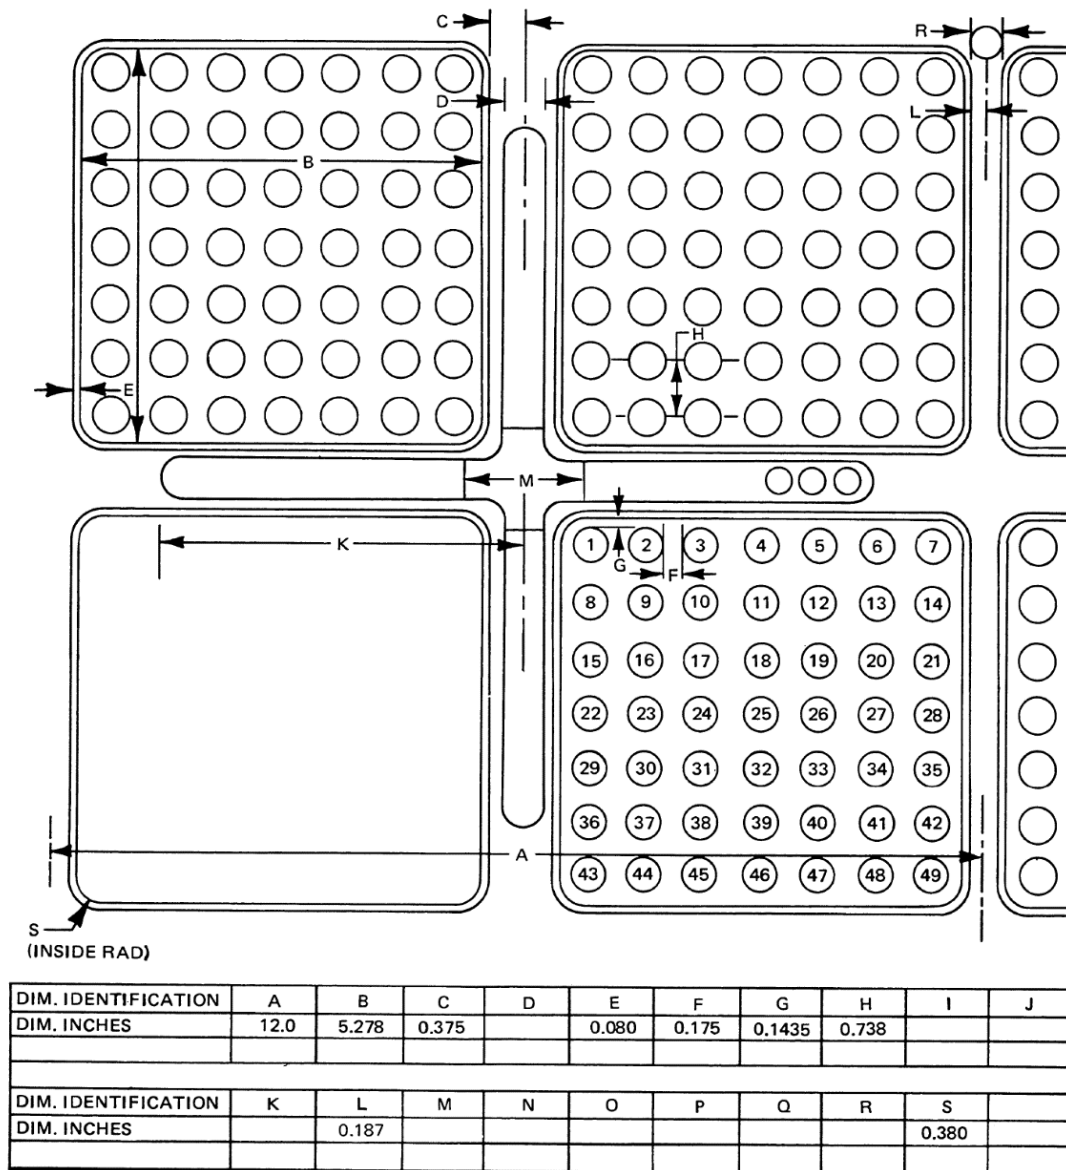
Assembly and control rod configuration for the 7 × 7 assembly [1].
